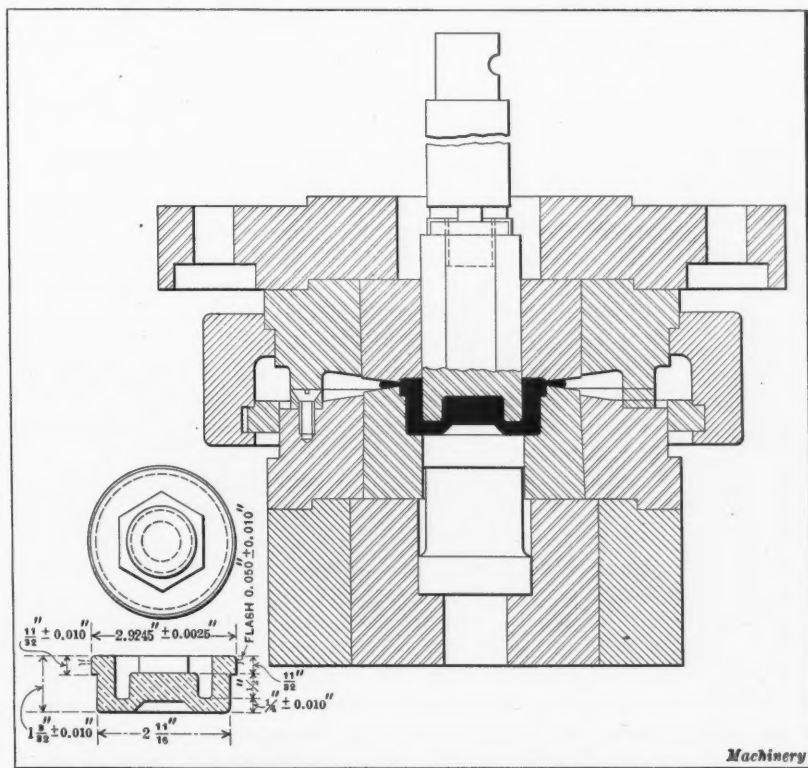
Double-action Dies for forging Brass Motor Cylinder Valve Chamber Plug Inlets
